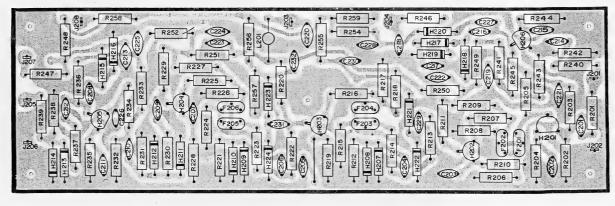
FM IF Amplifier Assembly P200 Component Locations
